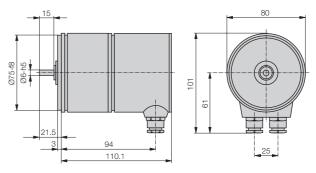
Basic unit with additional gear (fixation see Fig. 12).
